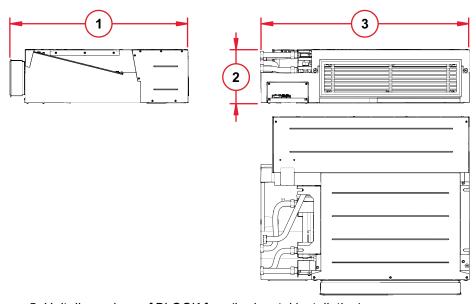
Unit dimensions of BLOCK free (horizontal installation)
